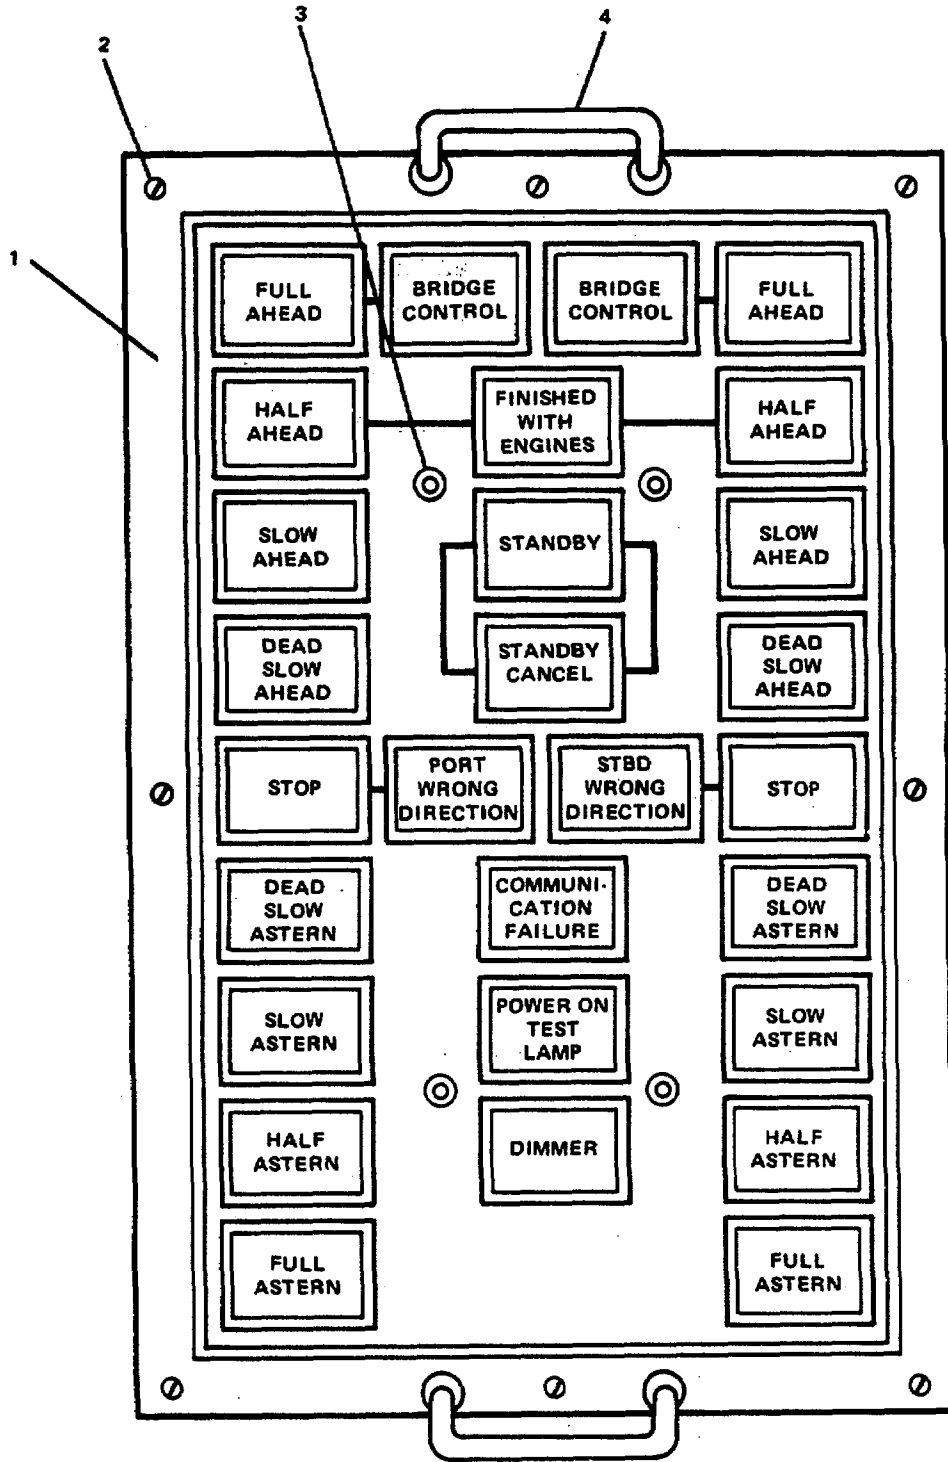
EOT Engine Room Panel Assembly.
